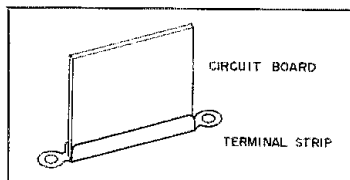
A terminal-strip mounting bracket is used to hold a small circuit board.
